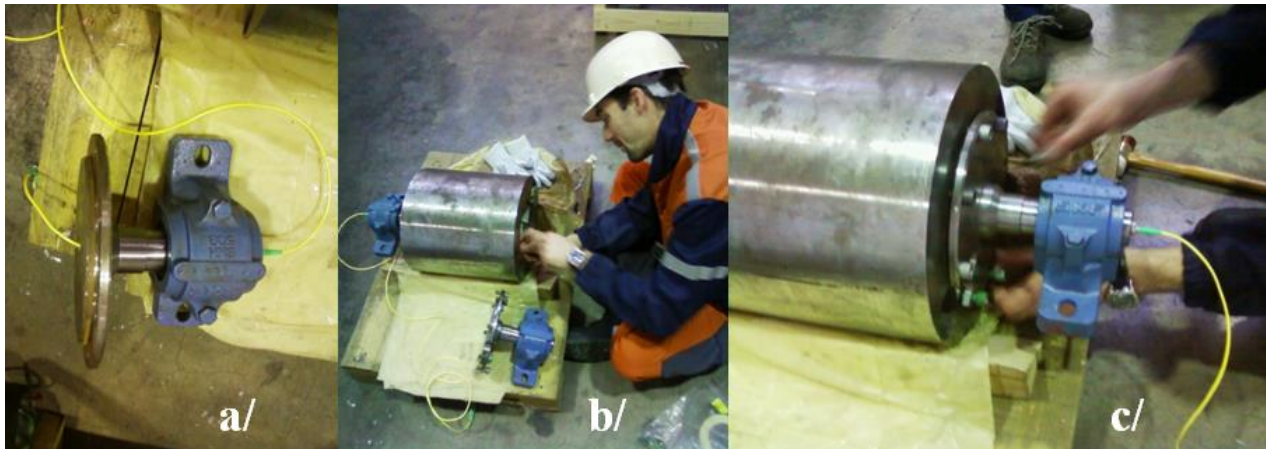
Mounting of flanges and thrust bearings onto the prototype roll at Constellium premises (Voreppe, France). a/ Flange mounted onto its thrust bearing, b/ and c/ mounting onto the prototype roll.
